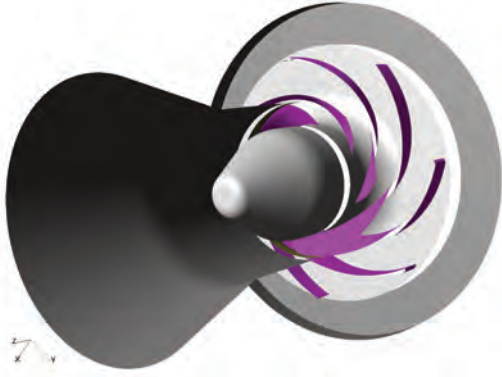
Impeller #1 Model with thru Shaft Simulation.
